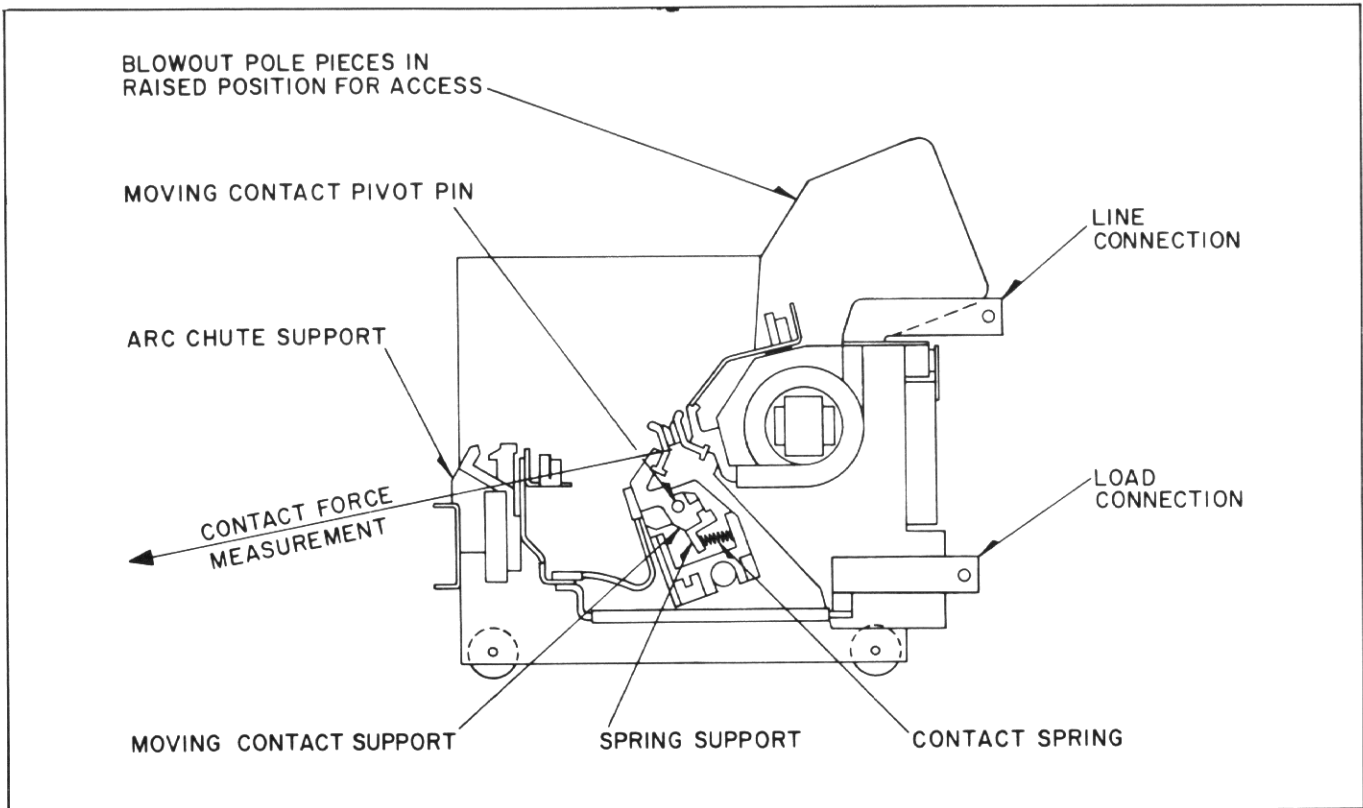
Contact Force Measurement (Dwg. 3513C86)
